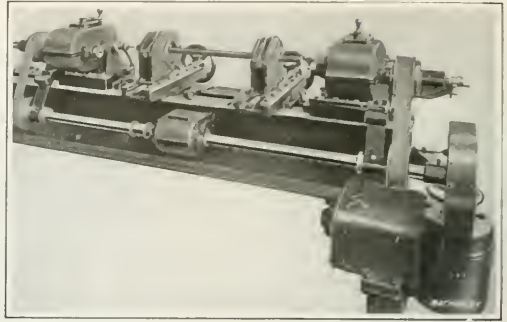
Close View of Pawling & Harnischfeger Centering Machine working on Shaft $1\frac{1}{4}$ Inch in Diameter by 30 Inches Long
